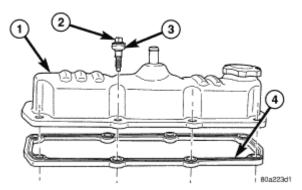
Cylinder Head Cover Gasket Courtesy of CHRYSLER LLC
